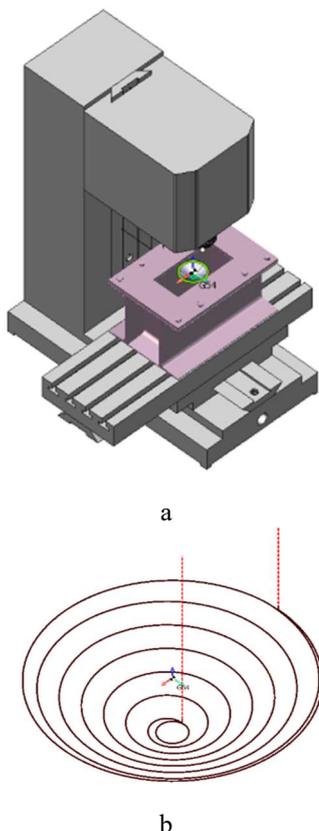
Strategy 1: *a* – kinematic model of Haas Mini Mill CNC machine-tool; *b* – spiral processing toolpath.
